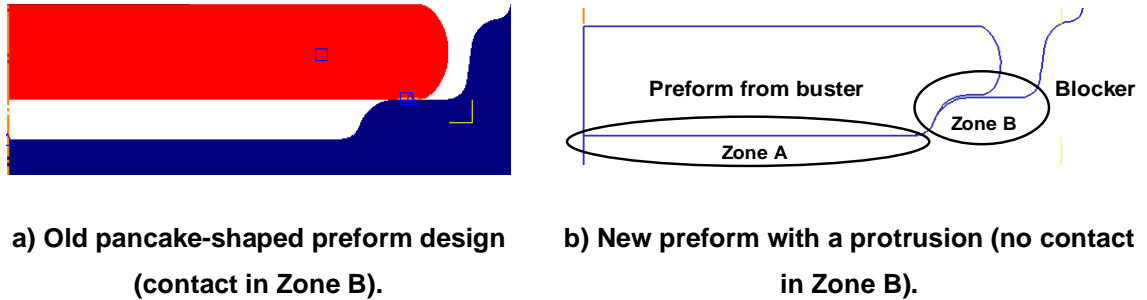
Preform design modification to reduce contact time between the die and workpiece.
